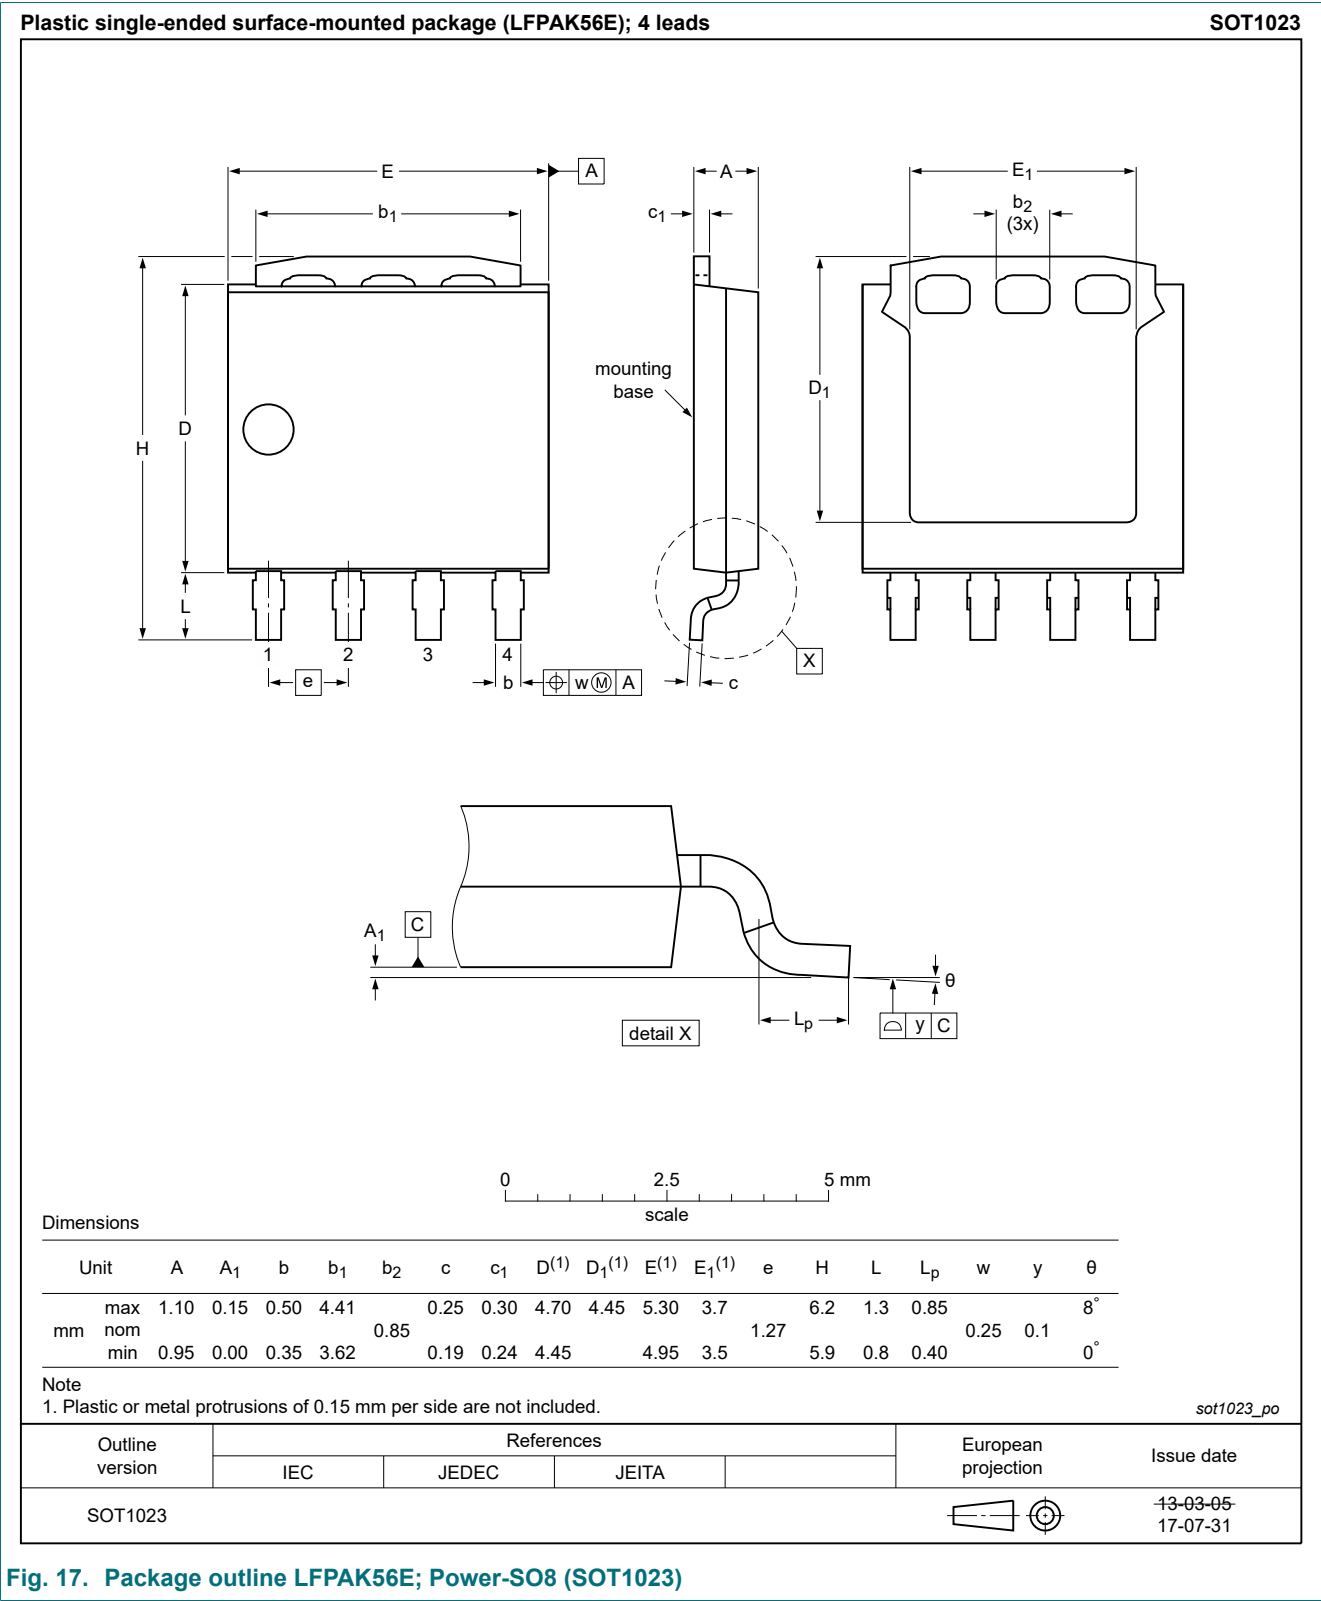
Package outline LPAK56E; Power-SO8 (SOT1023)
